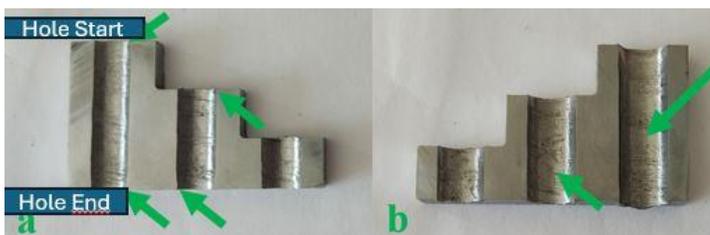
Drilling operation before maintenance; (a) Diameter changes at the top and bottom of the hole (b) Rough surfaces on the hole surface
